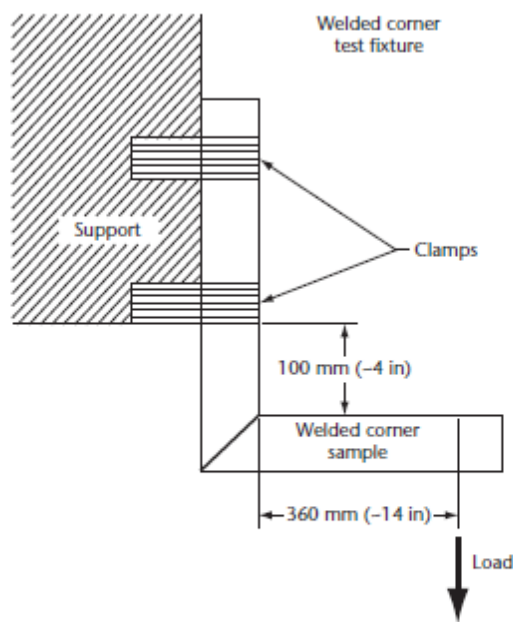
Vinyl Corner Weld Test Fixture
